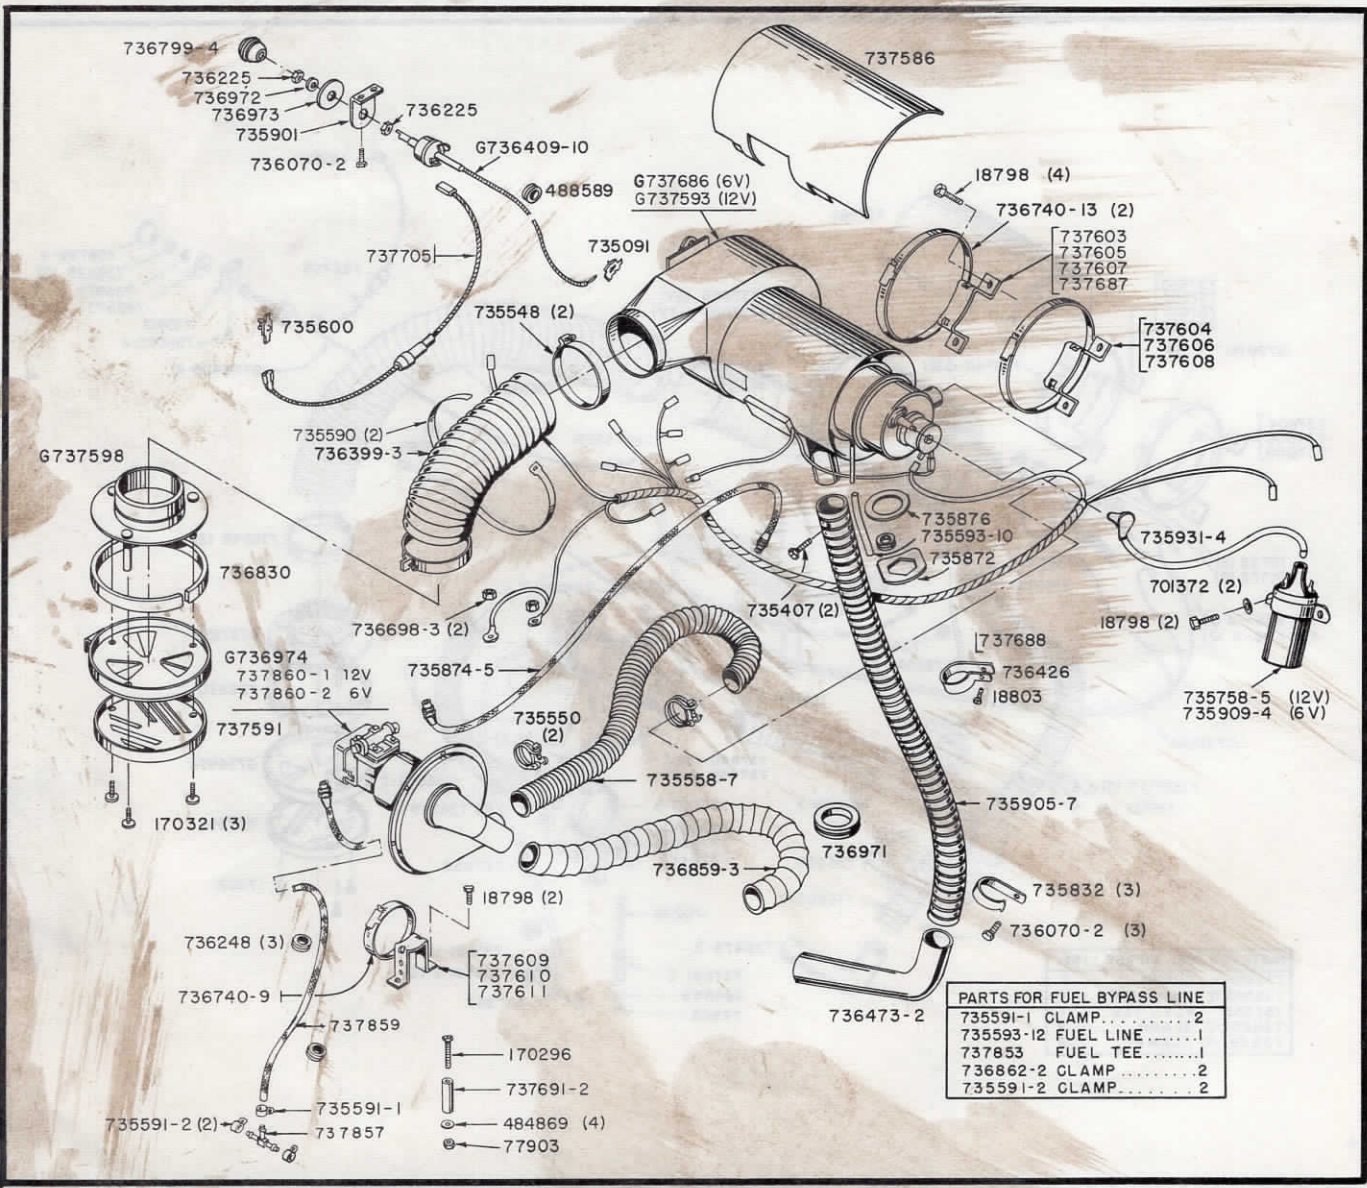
EXPLODED PARTS VIEW - LEFT SIDE
